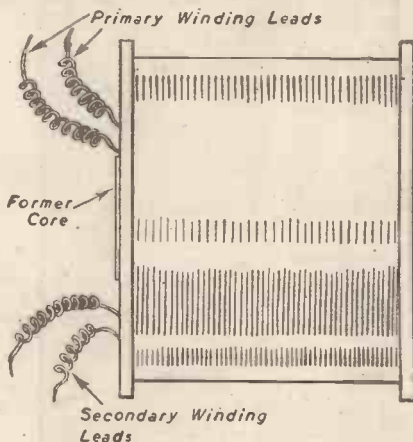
The finished windings. Note.—The former core should be flush with the transformer ends, but is illustrated projecting slightly to show the relative position of the leads.
